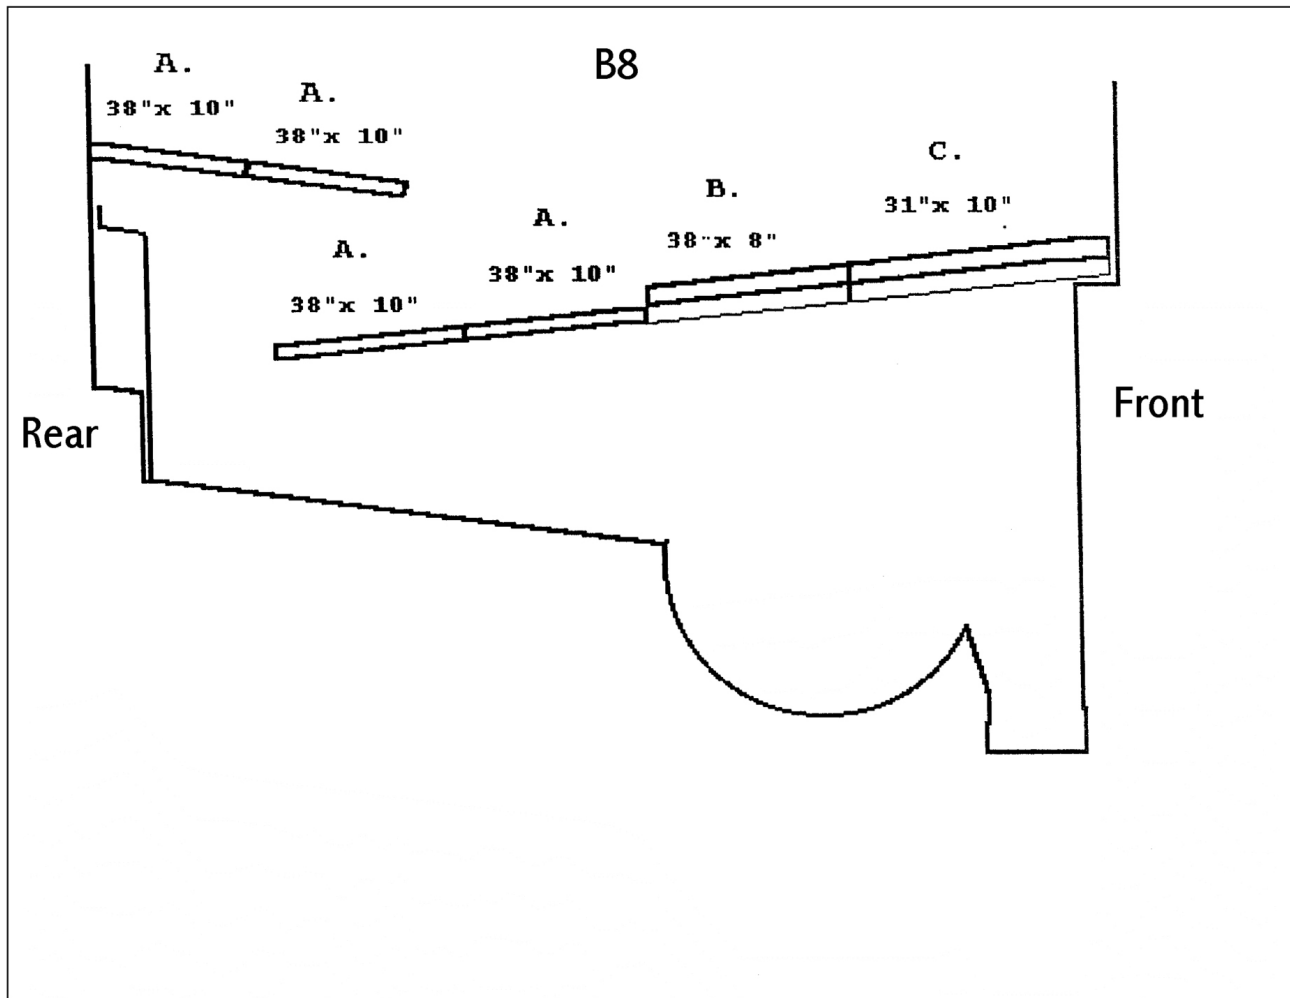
B8 board placement and alignment, side view of inside plastic dispenser tank
